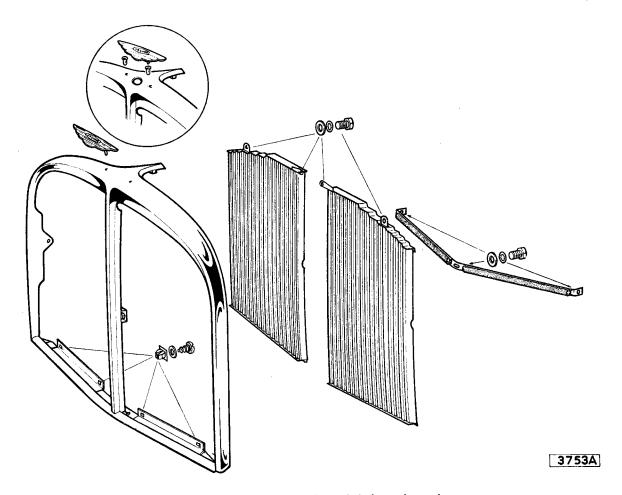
The radiator grille dismantled. Inset shows the top fixing on later cars.
